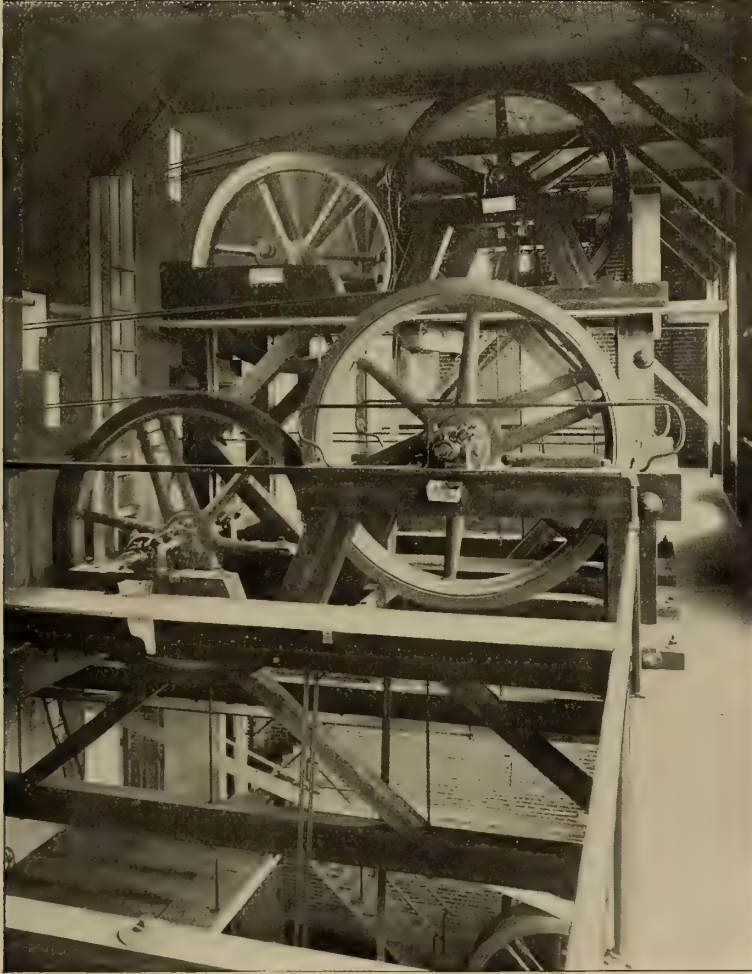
JACK SHAFT TOWER FOR A ROPE DRIVE.
